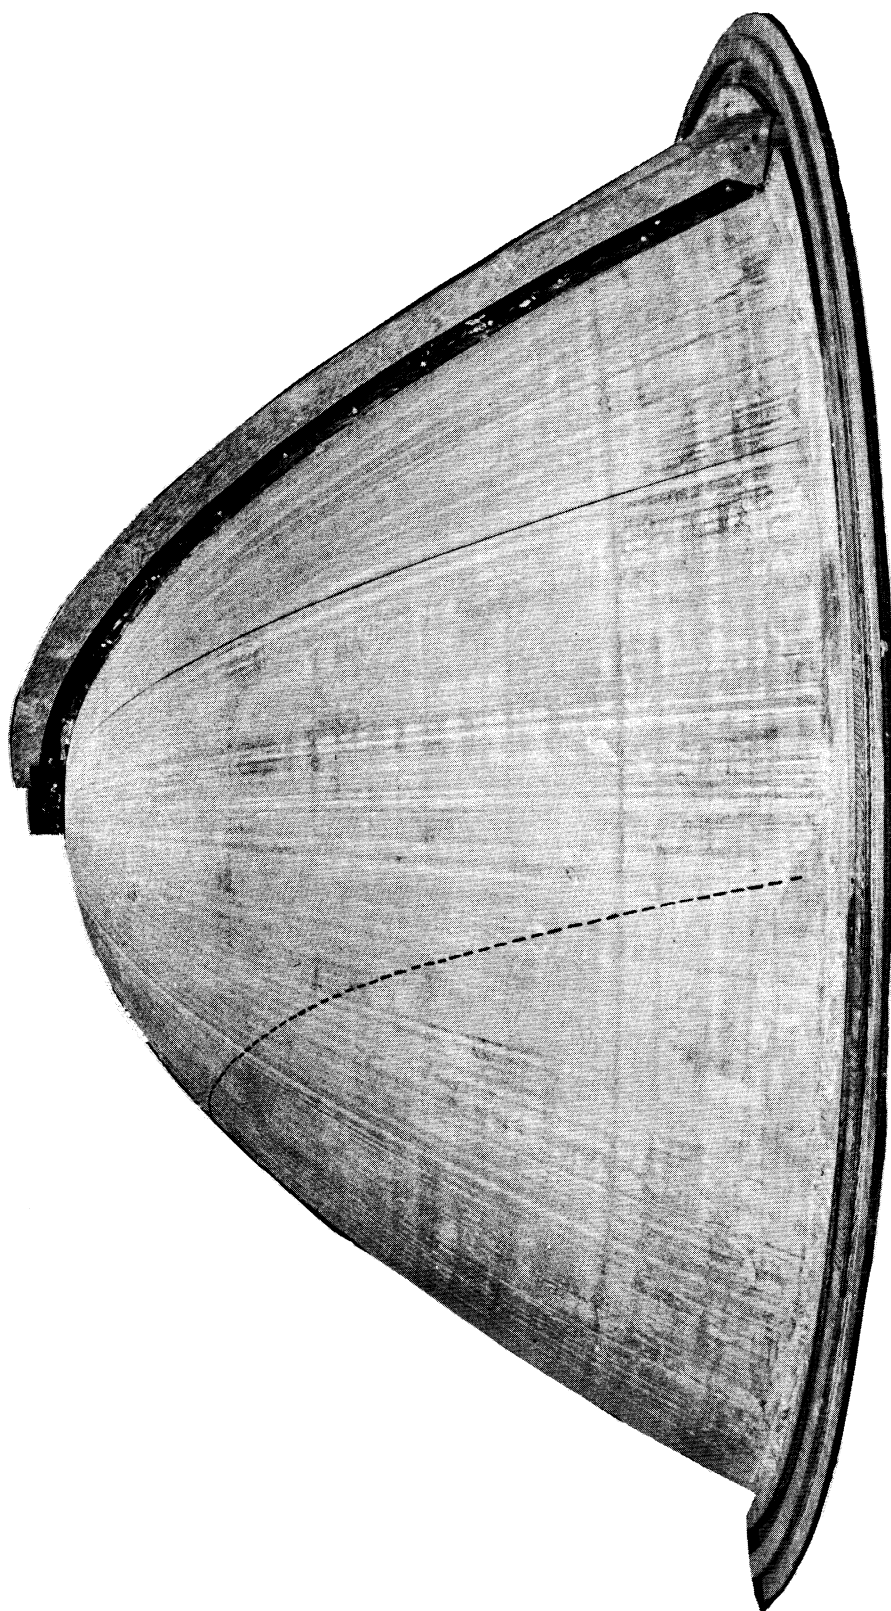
FRONT VIEW OF REFLECTOR MOLD AND SCRAPER
